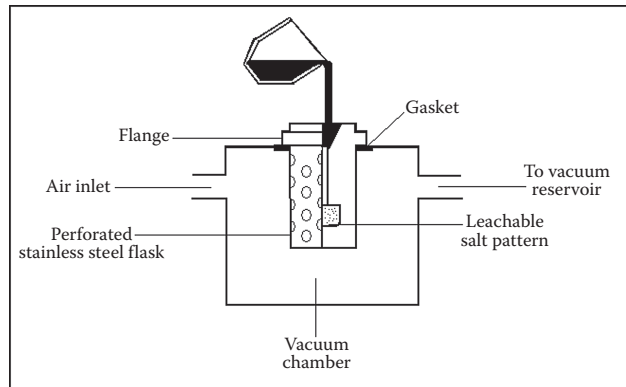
Schematic section of vacuum-assisted solid mold foam metal casting with leachable pattern
